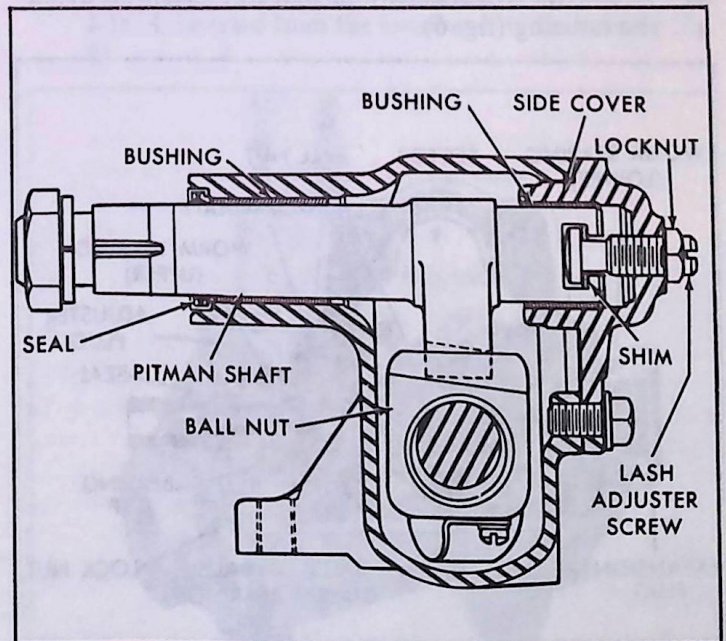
Steering Gear (Except Corvette and G10-30 Series Trucks)
